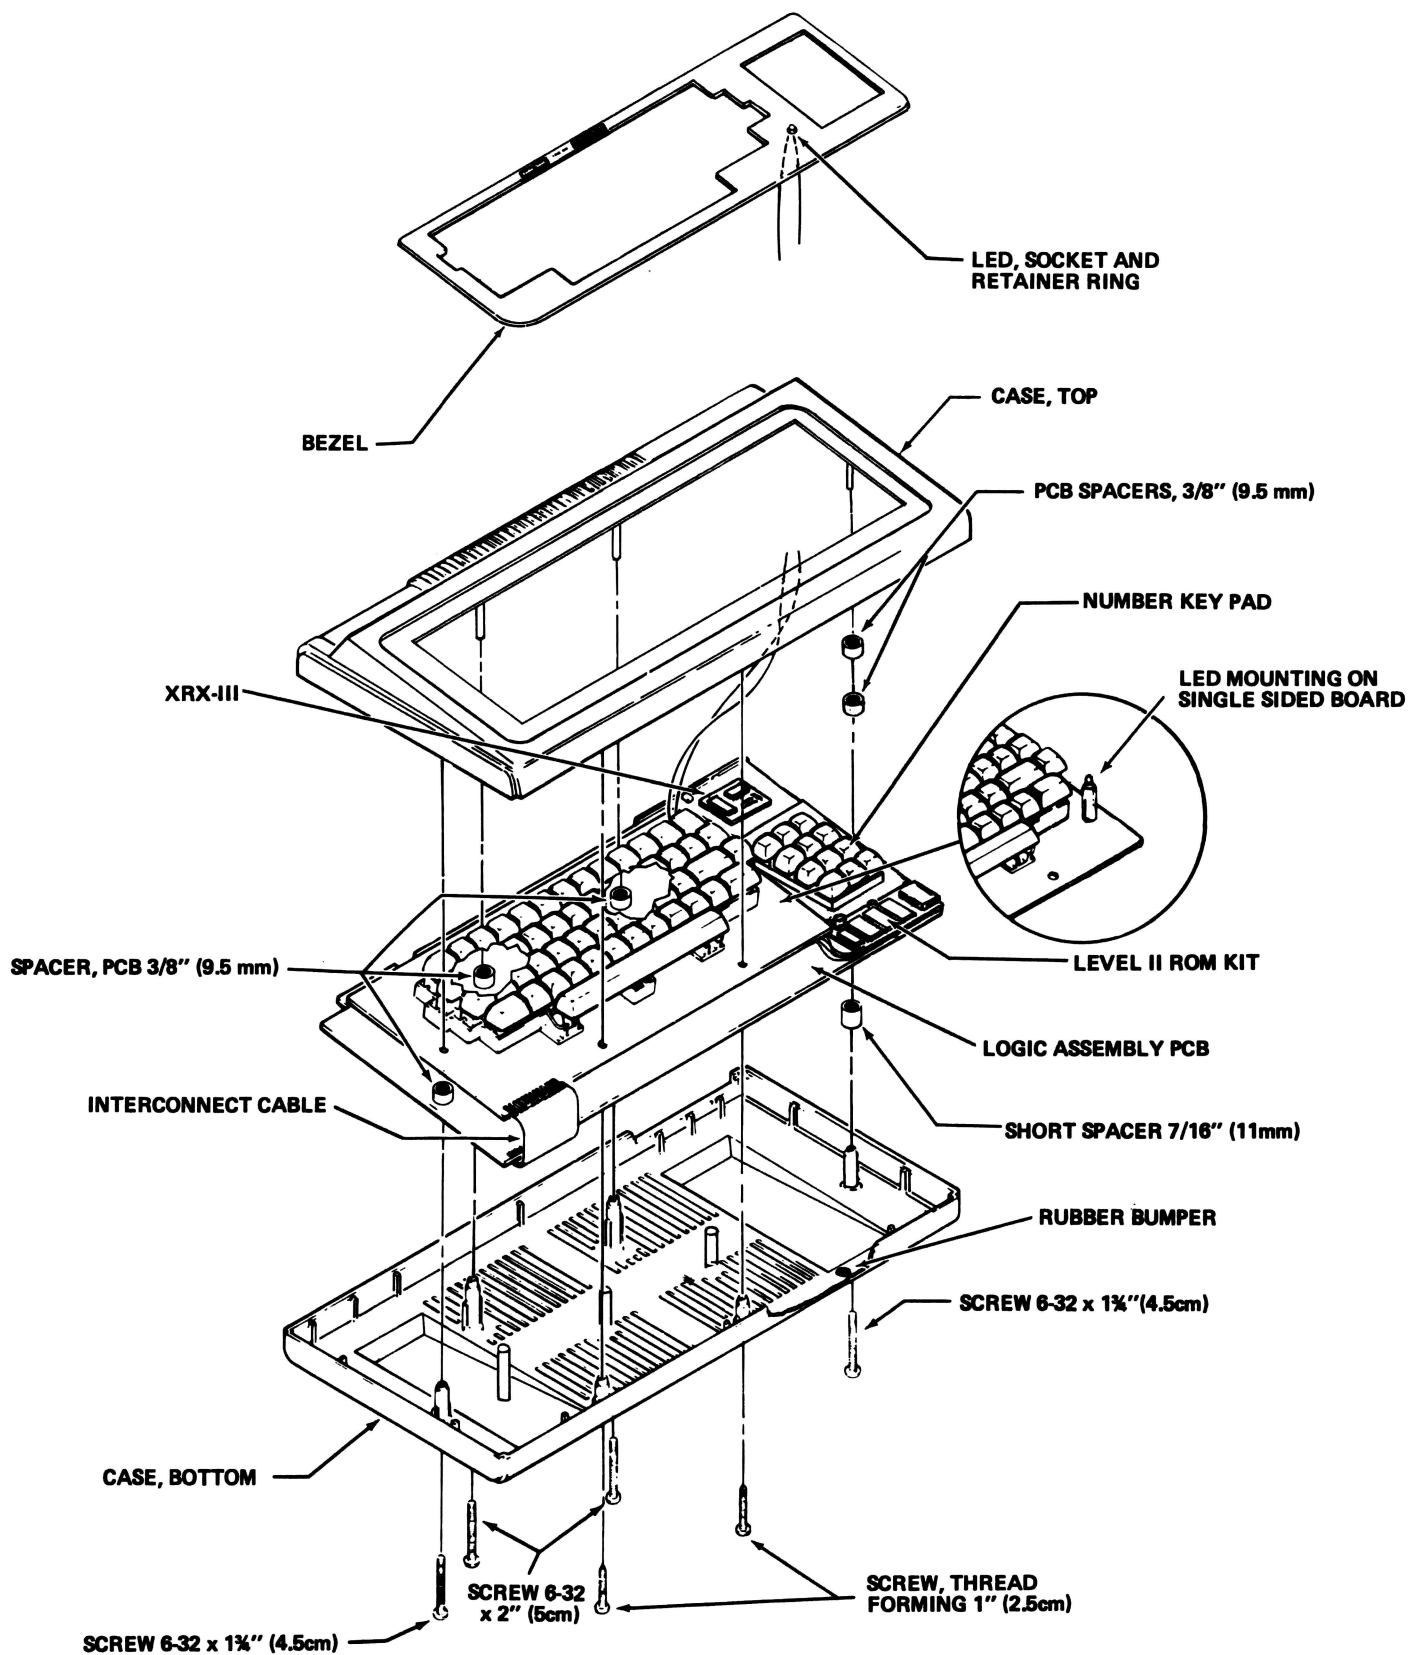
EXPLODED VIEW OF TRS-80 MICROCOMPUTER
